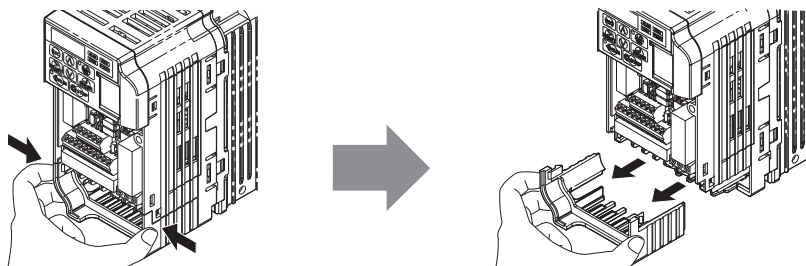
Remove the Bottom Cover on an IP20/Open-Chassis Drive (Models CIMR-V□BA0001B to BA0003B and 2A0001B to 2A0006B)
